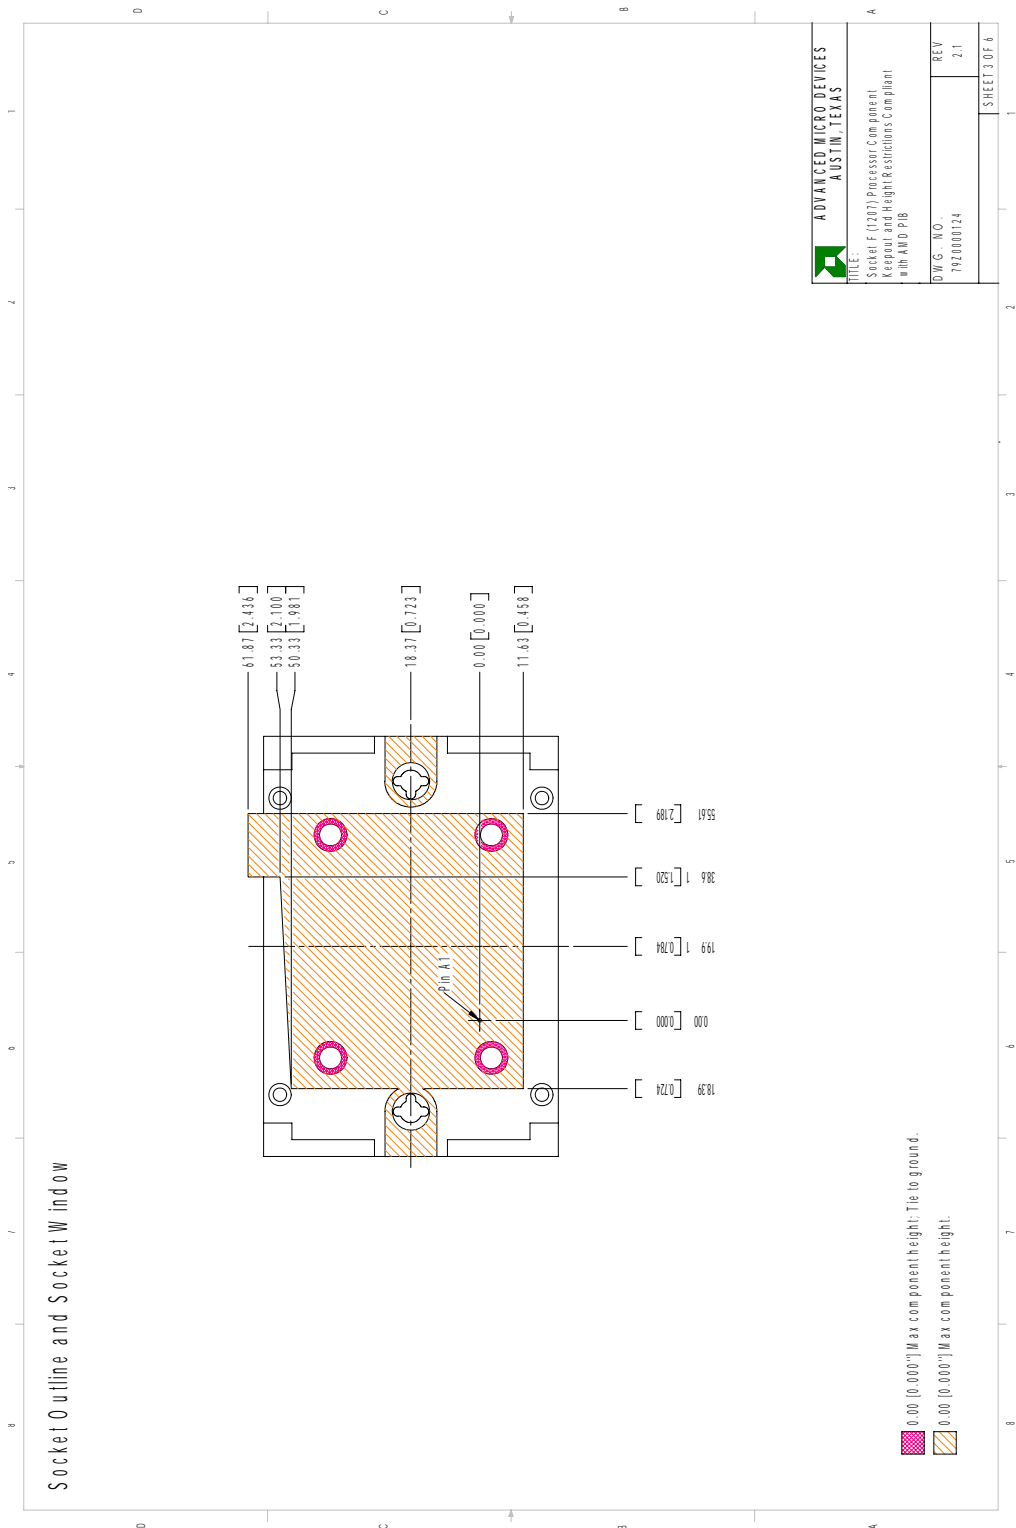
Socket F (1207) PIB Socket Outline and Socket Window
